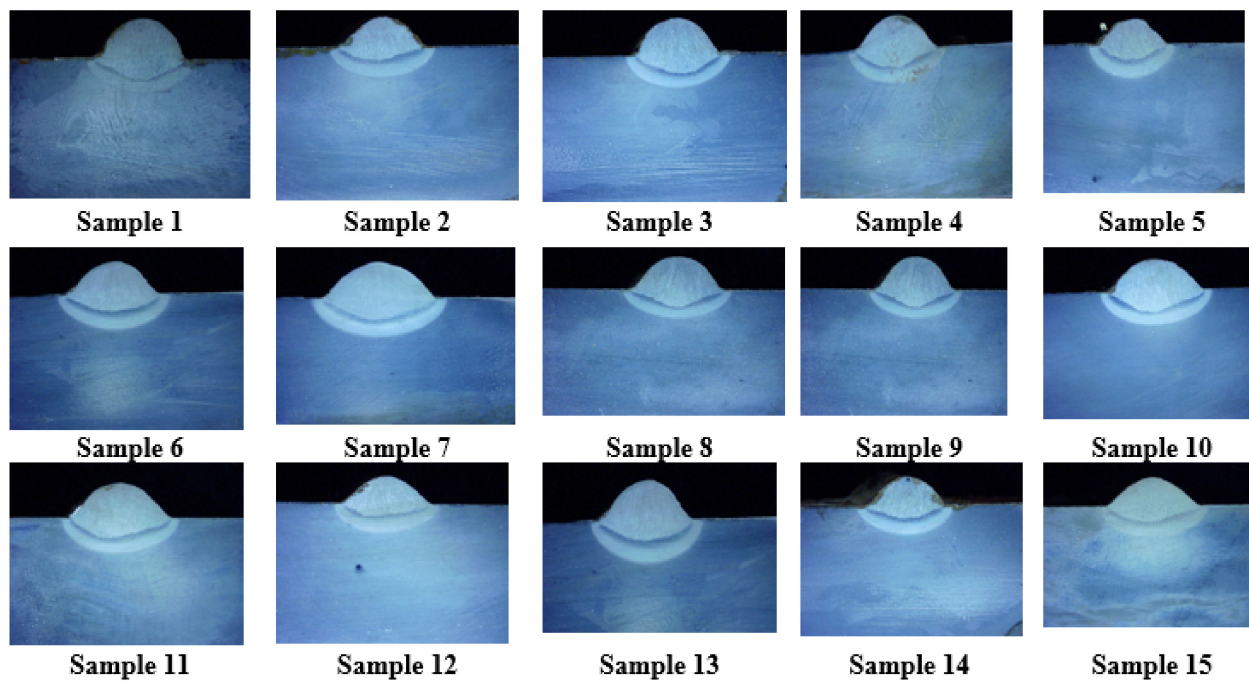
Cross-sections of specimens of single bead deposition for bead geometry measurements.
